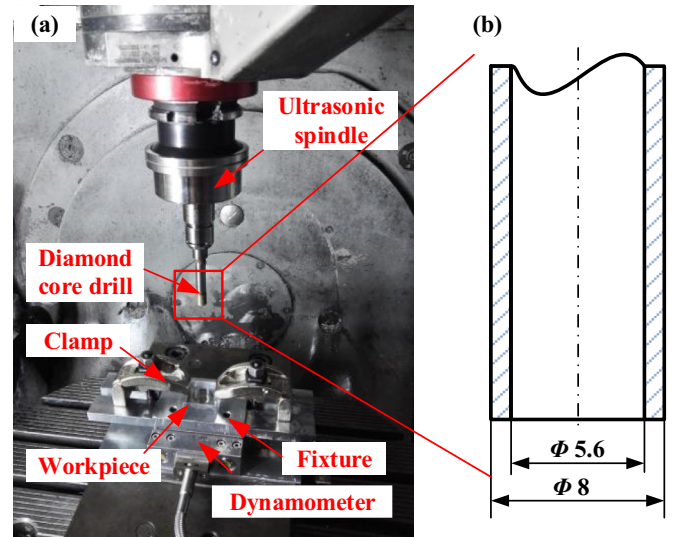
(a) Experimental setup and (b) dimension of diamond core tool.
